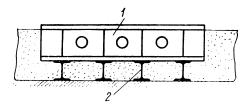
Mounting the bed plates on I-beam pads I — bed plate; 2 — pad
